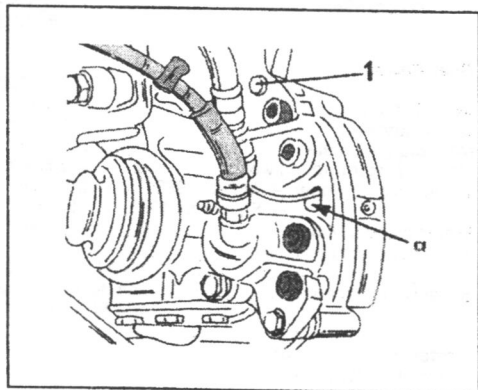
Details for the removal and installation of a brake caliper.
